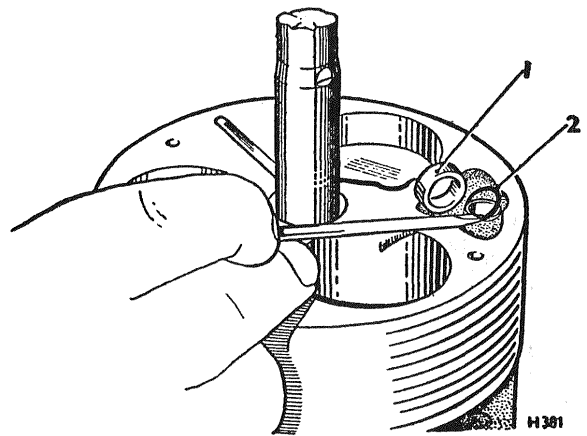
FITTING THE CROSS-OVER TUBE 'O' RING
